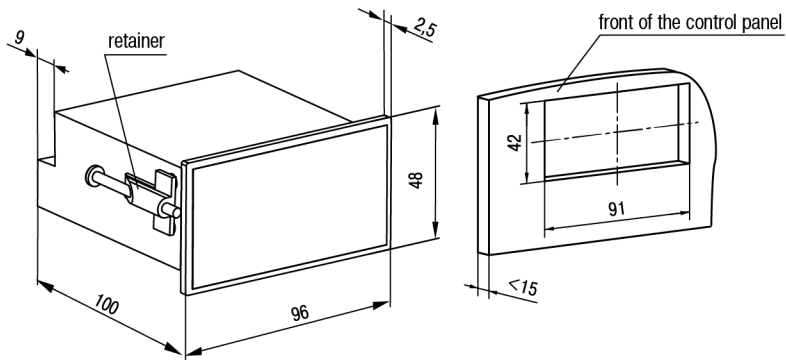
Dimensions of $\mathbb{U}2$ housing
